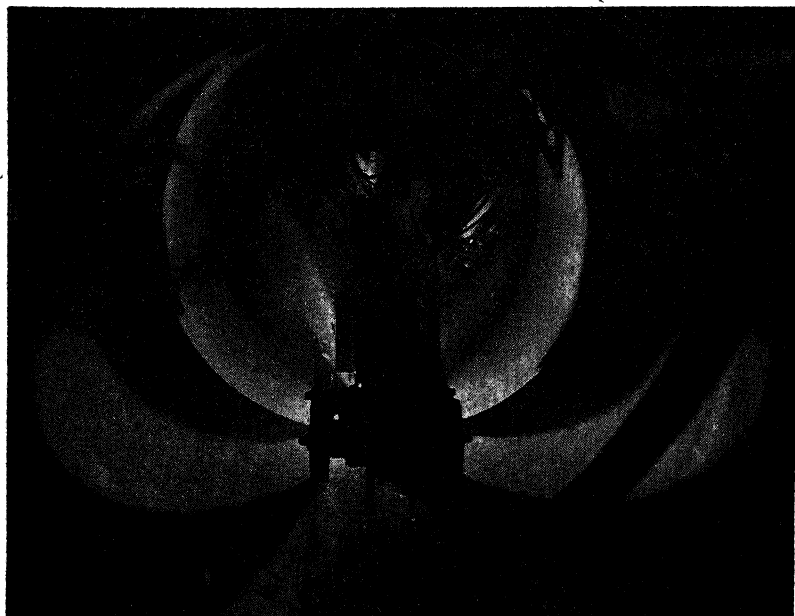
Tractor type automatic shielded carbon arc welder welding the inside seams of 51-inch pipe.
